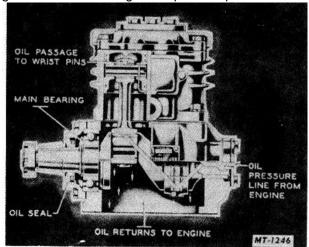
Sectional View of Compressor Oiling System OPERATION
